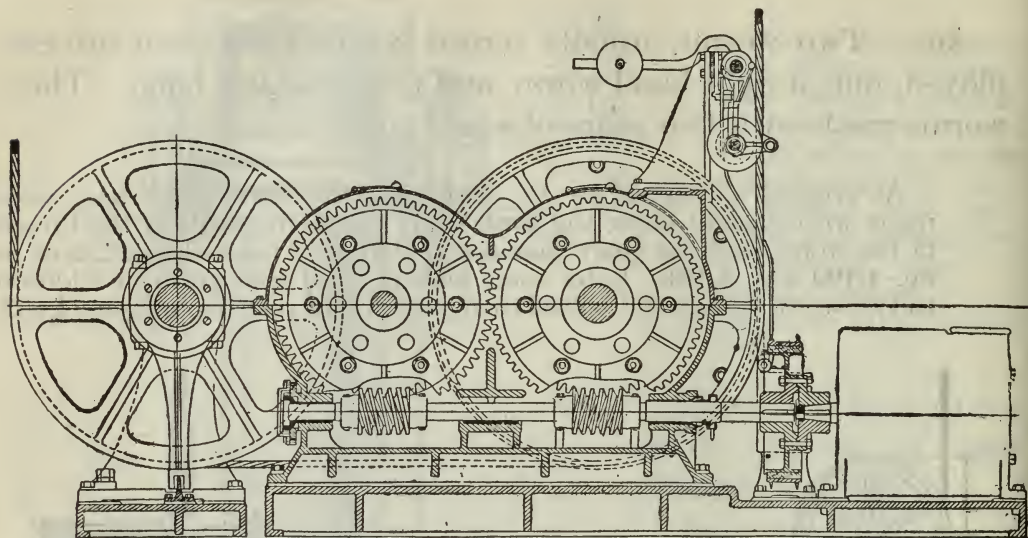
,192.—Tandem worm drive machine with independent concave face gears meshing with the worm as shown by the portions of the larger gears cut away above the worms. As shown, there are four gear wheels bolted together in pairs, the two larger ones meshing with each other, and the two smaller ones with the worms.
